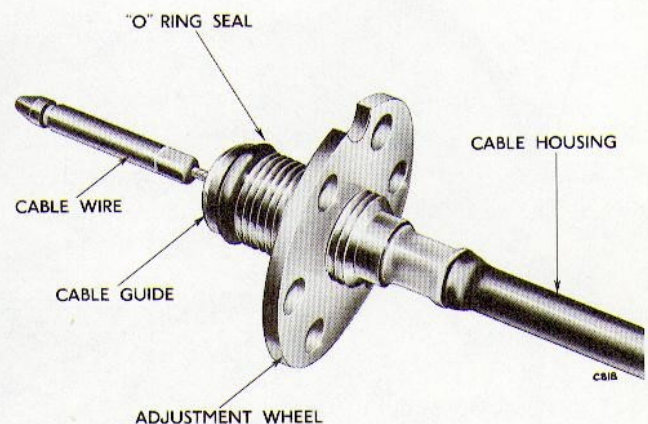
Gearshift Control Cable and Adjustment Wheel
